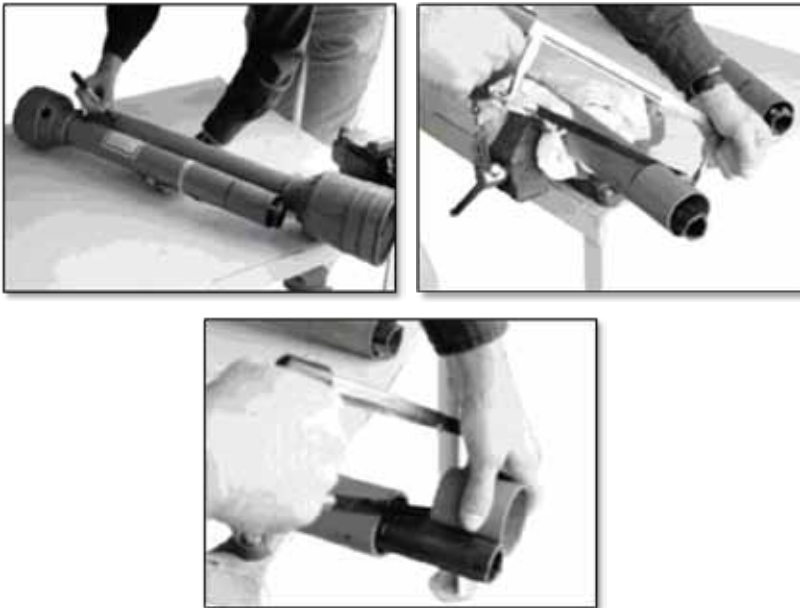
Adjusting the length of the P.T.O shaft to the proper dimension for the tractor.
